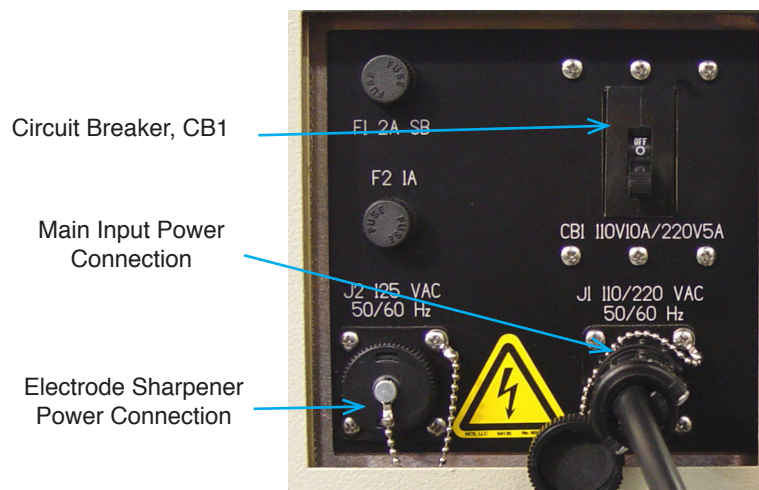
, Right Side View Showing Circuit Breaker CB1
